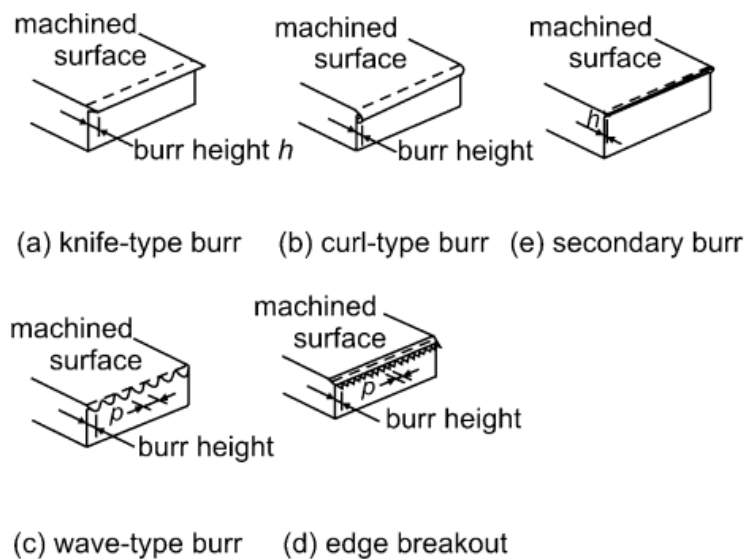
Five types of burrs observed in face milling²⁾.
